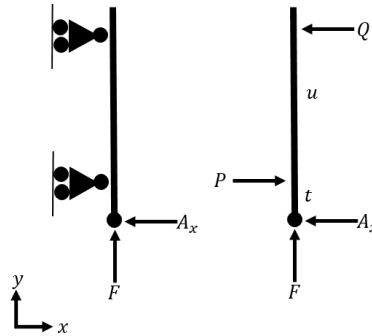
force on linear motor bearings for $s=0$, where the rod is maximally extended making a large lever arm.
